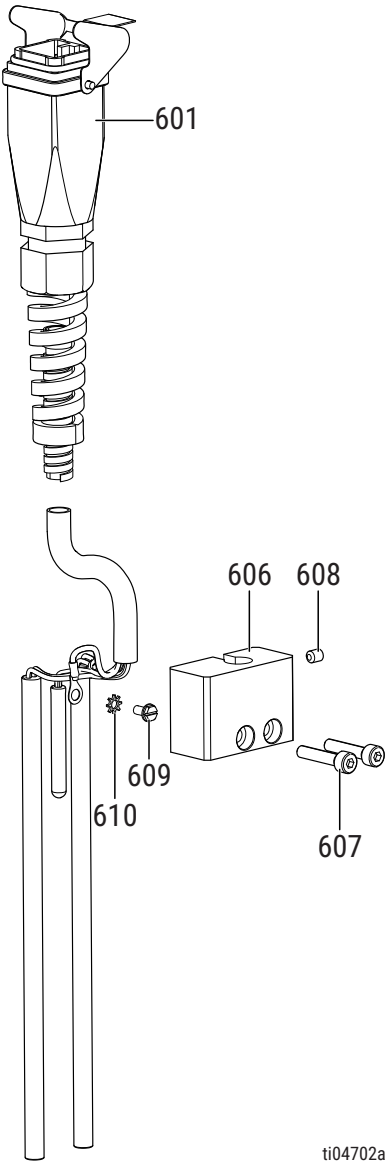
Heater Assembly (for 200 mm Outlet Block)
